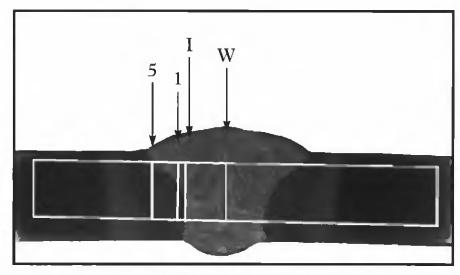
Transverse weldment sections showing locations of Charpy V notch in %-in., single-pass submerged arc weldment.
